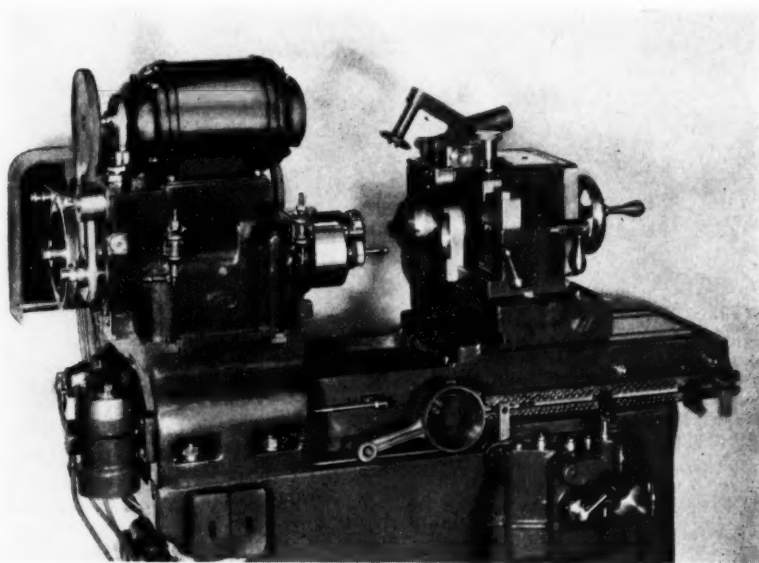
Machine Set up for Simultaneously Boring Two Holes that Vary Greatly in Diameter
